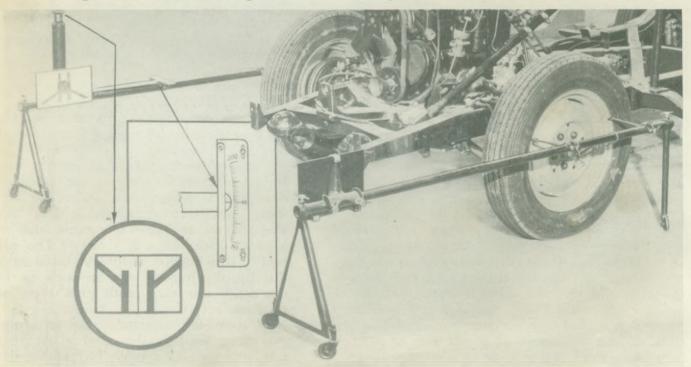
Checking front wheel alignment with Dunlop optical alignment gauge
